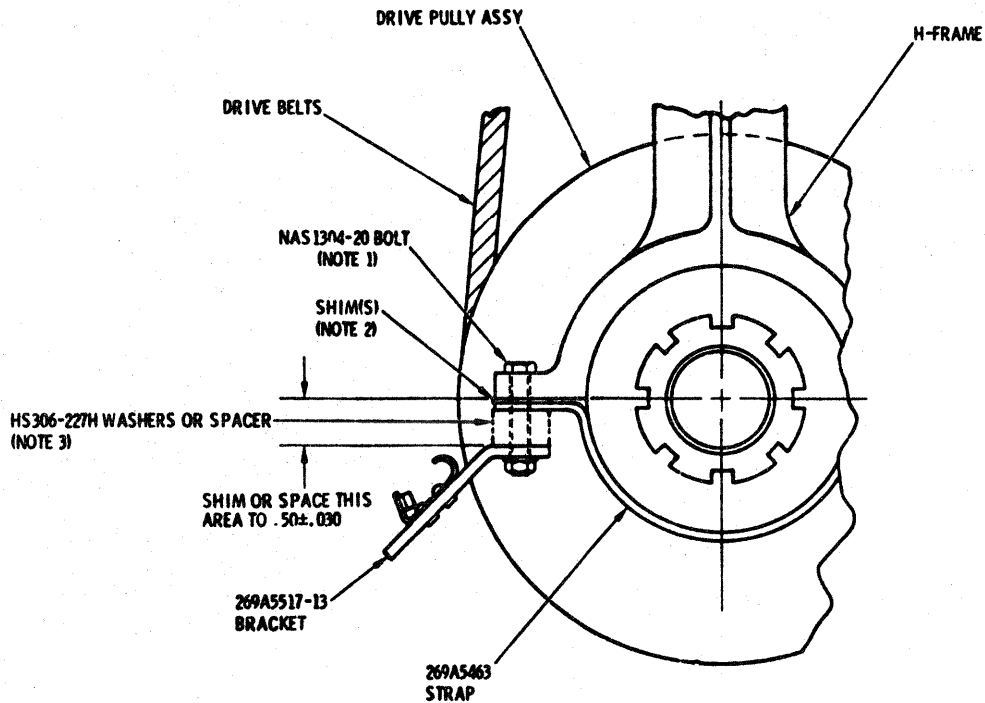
Installation of 269A5517-13 H-frame tie bar bracket assembly
